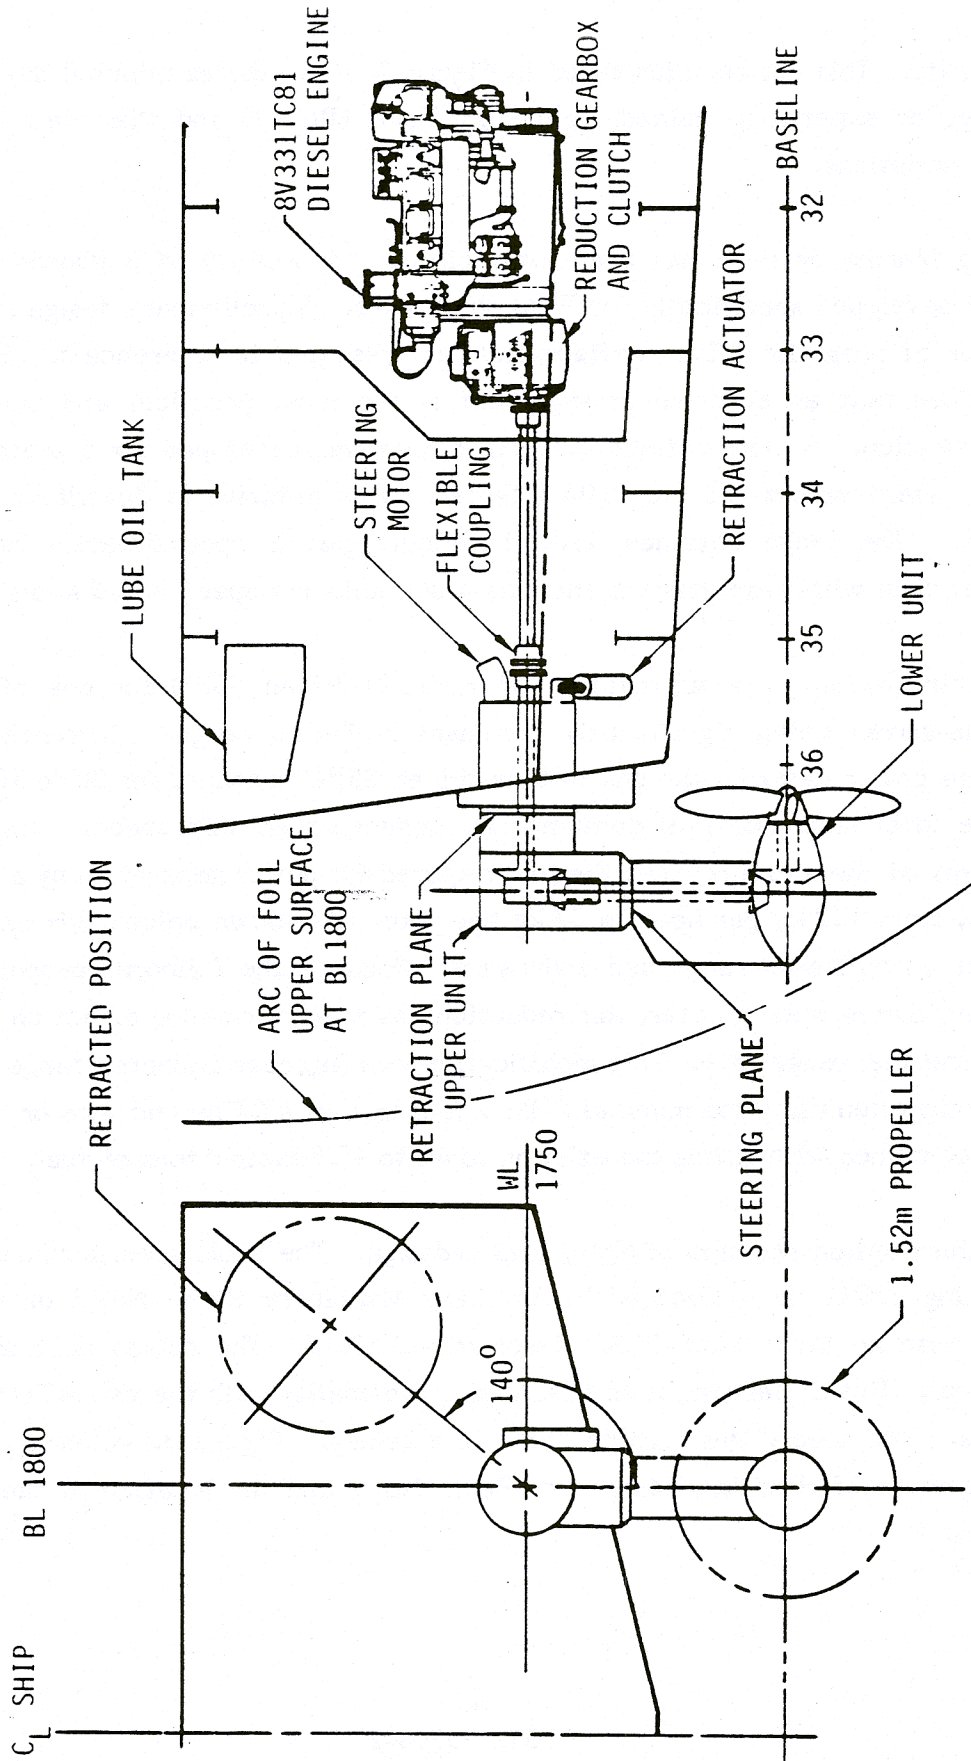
OUTDRIVE ASSEMBLY AND INSTALLATION
